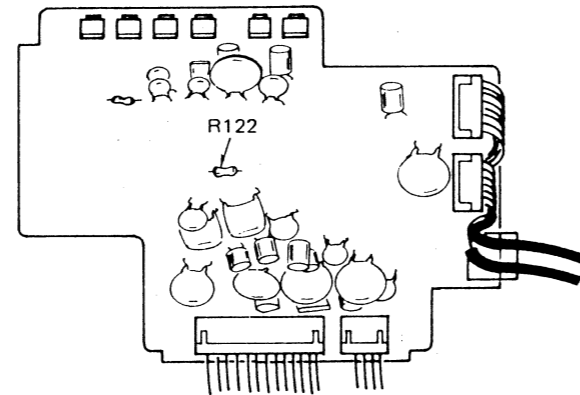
Top view of O3 P.C.B. (Head Amp.)
